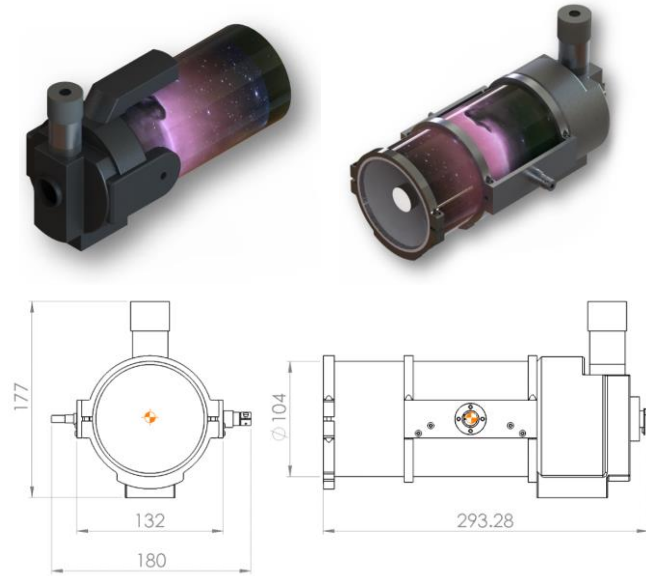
The ETX-90 model (top left), platform assembly (top right), and overall dimensions
